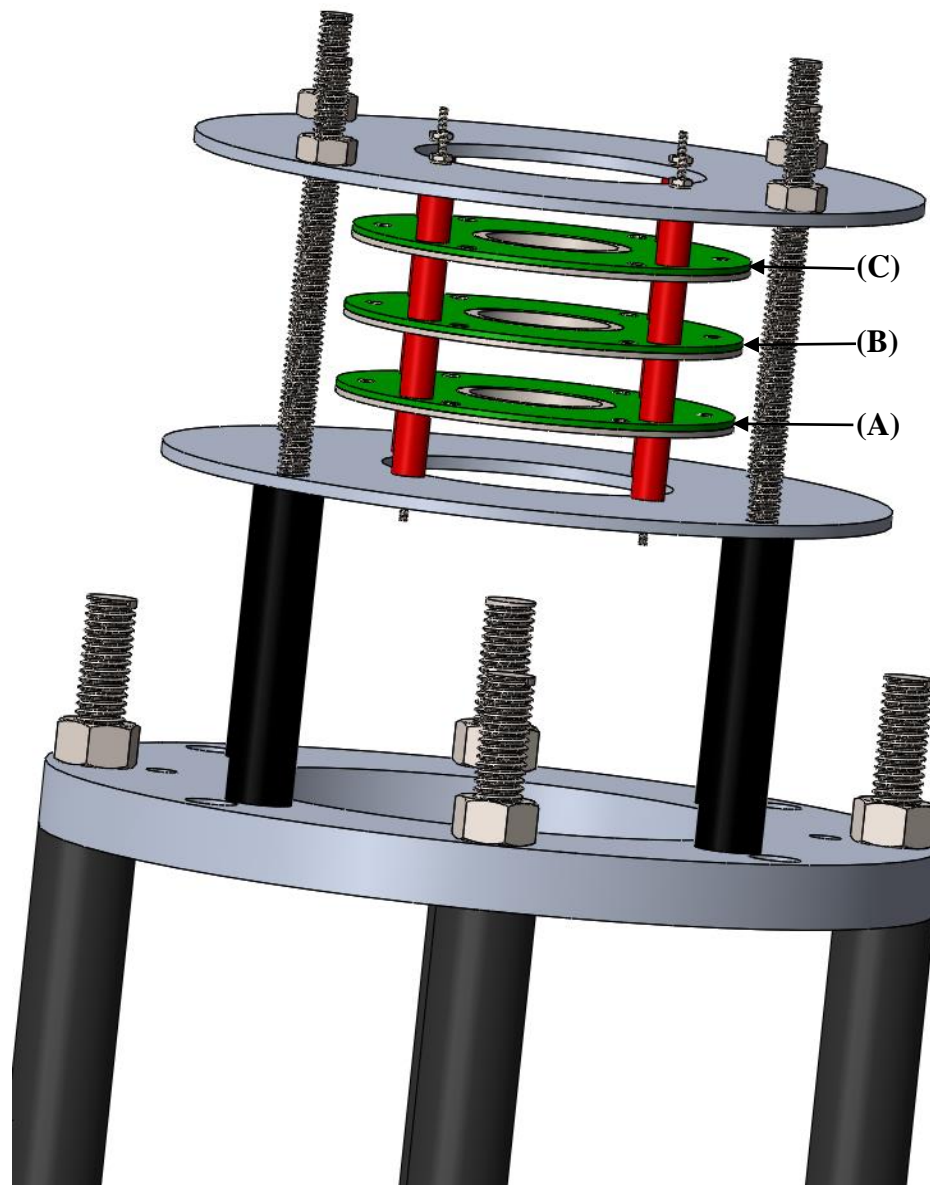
Side view of the mounted mass spectrometer. Drawn to scale. Each mass spectrometer plate stack was separated from each other by ceramic spacers and mounted using alumina tubes over 0-80 threaded rods for electrical insulation. Each stack consisted of a top plate and a bottom plate. Between the two plates a fine gold mesh was placed, covering the opening in each plate to create uniform electric fields inside the mass spectrometer. (A) Repeller plate stack. (B) Extractor plate stack. (C) Grounded plate stack.
